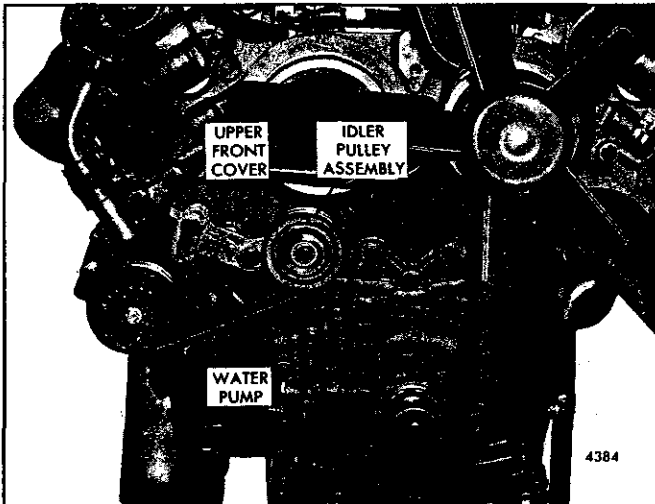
Typical Water Pump Idler Pulley Mounting
